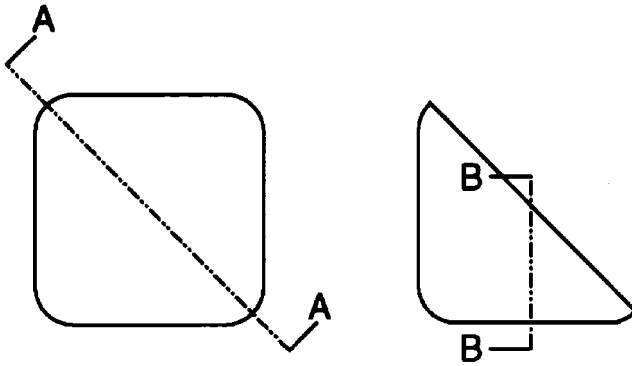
Top views of a mold insert showing the two cross-sections used for metallography
